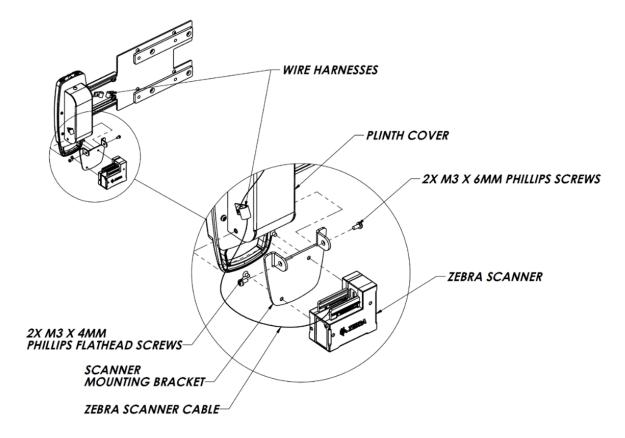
Attaching the optional Zebra scanner to the Payment Terminal/Scanner Mount for Kiosks.
